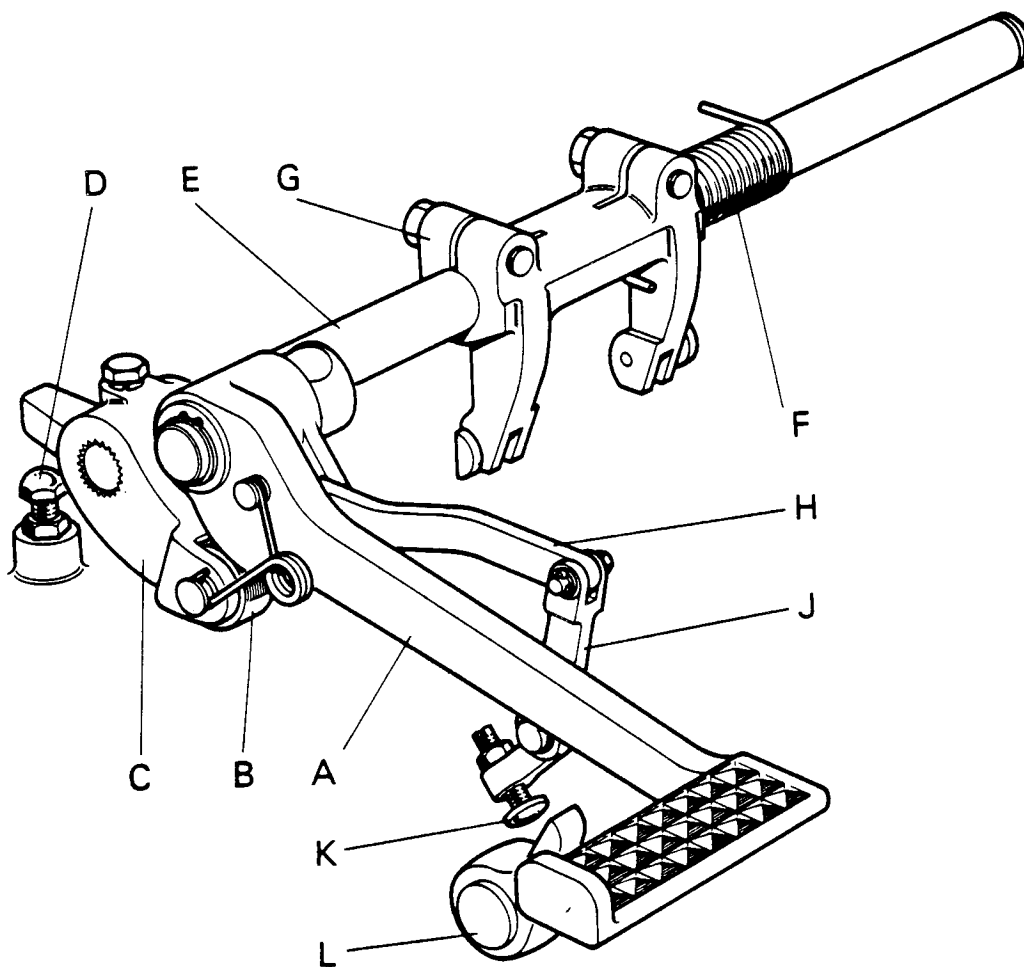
CLUTCH OPERATING MECHANISM — 780/3800 TRACTORS
